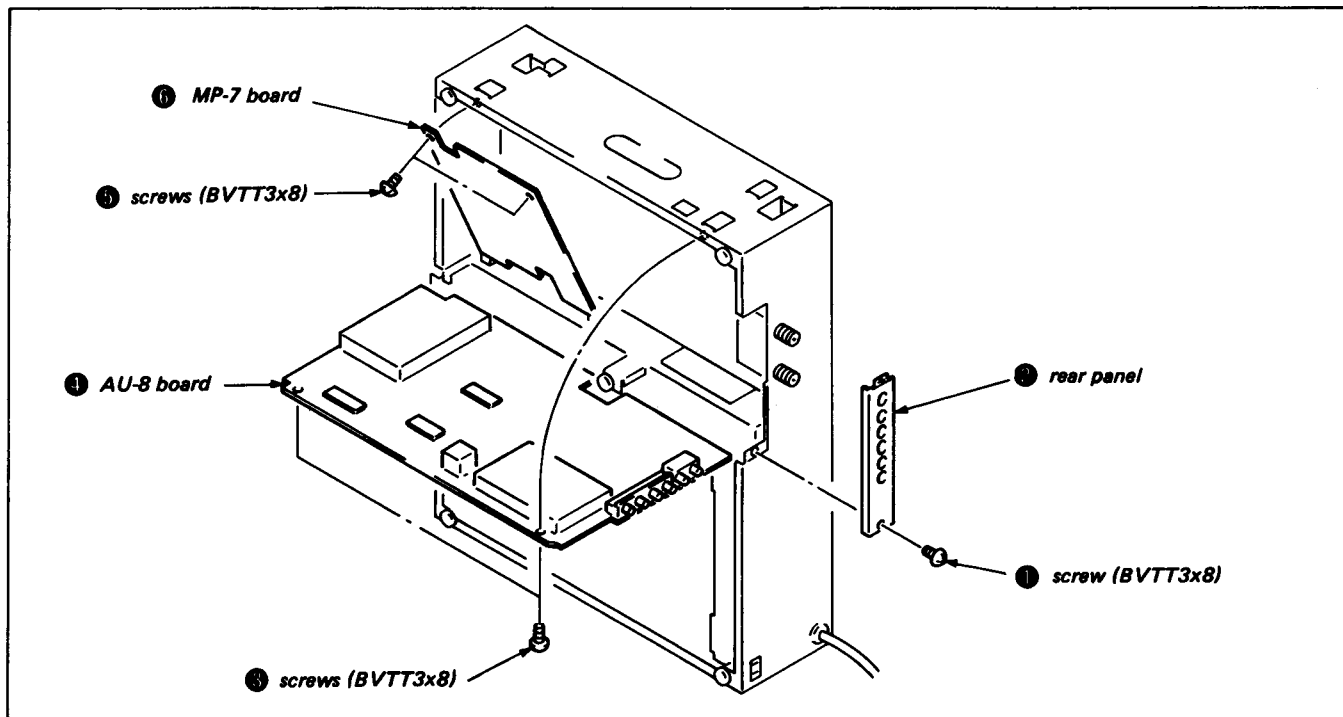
Removal of the AU-8 Board and MP-7 Board
